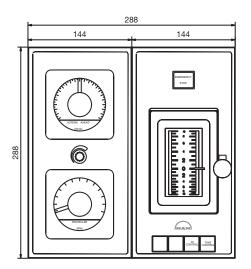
Bridge wing layout (indoor) for single propeller plant
